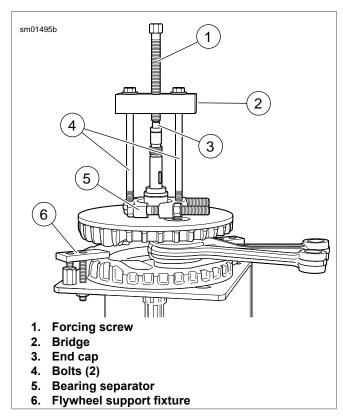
Pulling Pinion Shaft Inner Bearing
